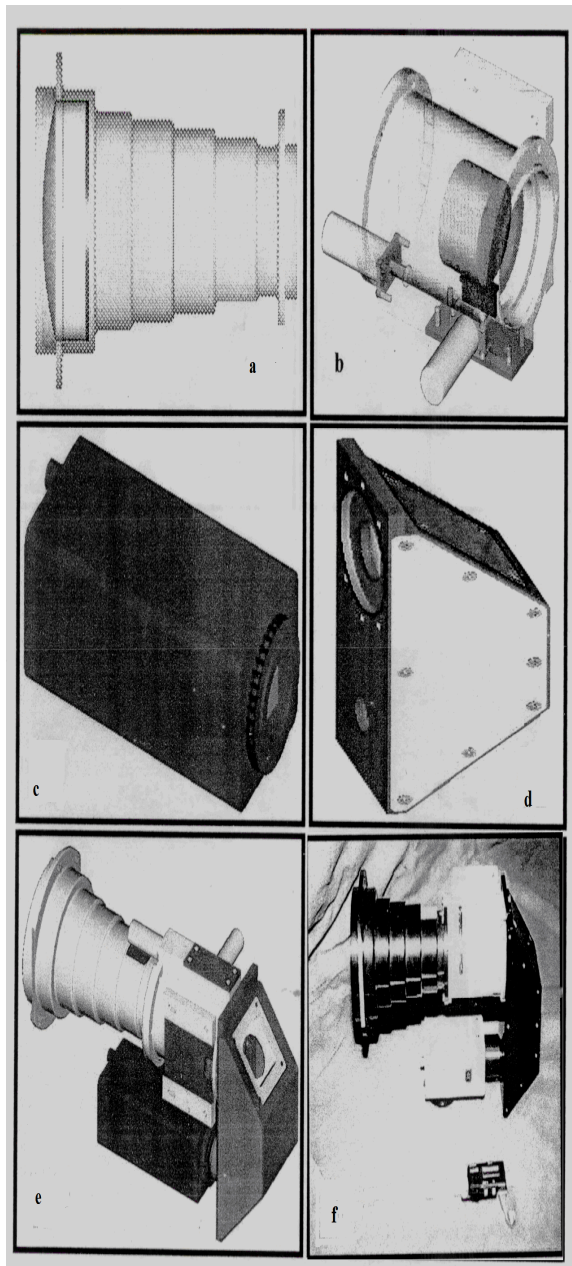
CAD modeled subassemblies of LRT (a – e); f – is the fabricated unit
